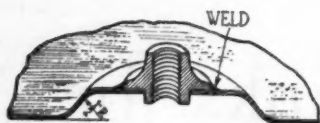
Tank "bumped" at point of attachment and casting welded on
